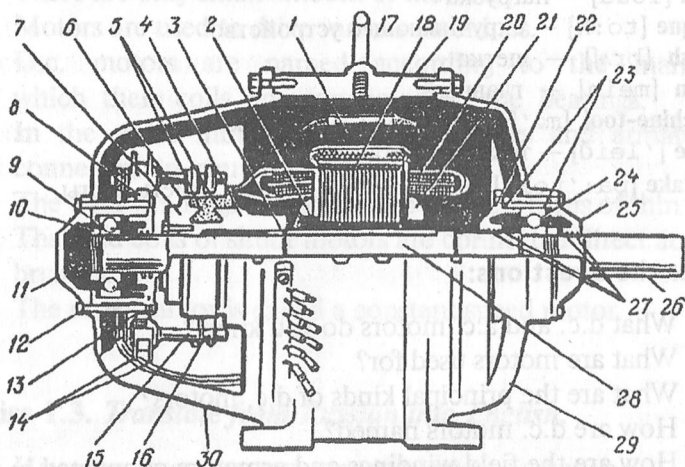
A Ball-Bearing Fully-Enclosed Fan-Cooled Direct-Current Motor:
